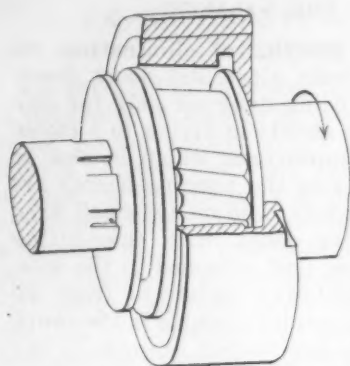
NOVEL FREE-WHEEL CLUTCH
